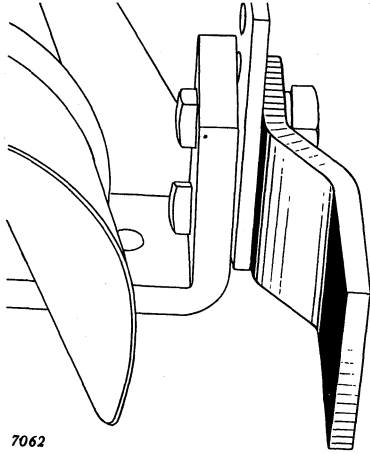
Beam Guide Plate Strap for Models "A" and "B" Tractors with Old-Style Draw-bars.
